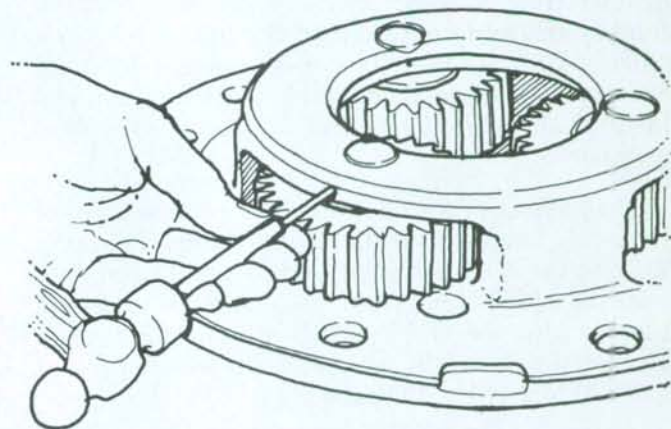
When disassembling planetary, drive out shaft roll pins as shown.
